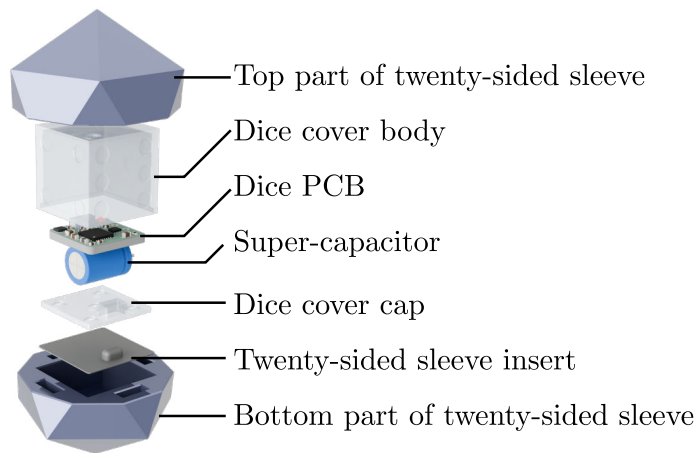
Exploded view of dice assembly, including twenty-sided sleeve.
